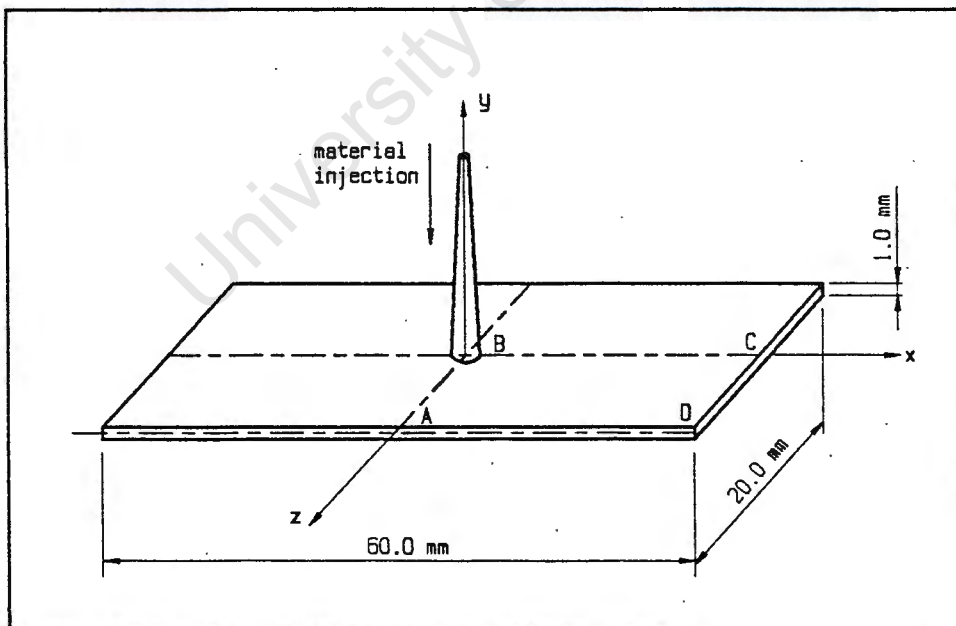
Geometry of an injection moulded part with a direct sprue gate
